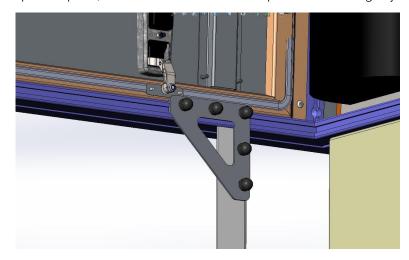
You can follow the process for Step 3 to install this bracket, it is the same regarding the drilling of the 2 holes and fastening, just on the right hand side Nut Slot not the Front
